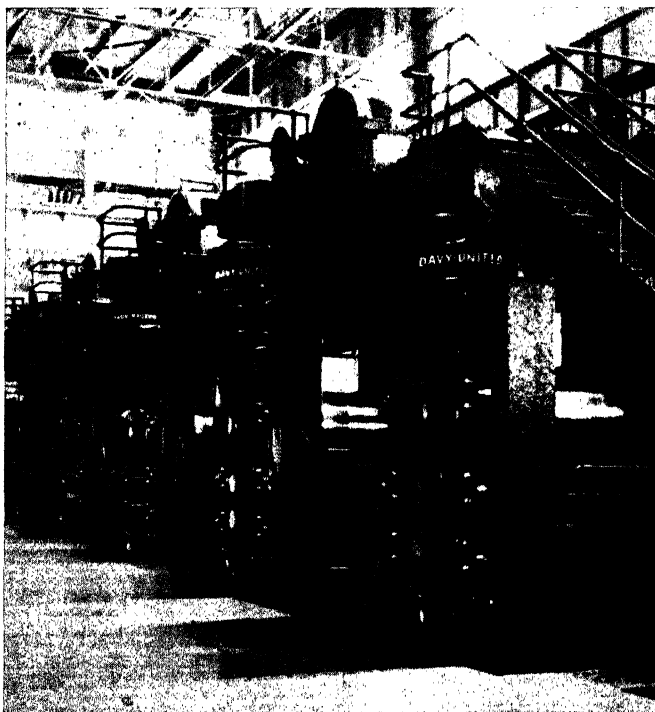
A 21-in. and 46×66-in. Four-High, Five-Stand Continuous Hot Strip Mill.
